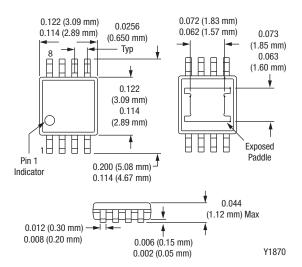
MSOP-8 Exposed Pad Package Dimension Drawing
